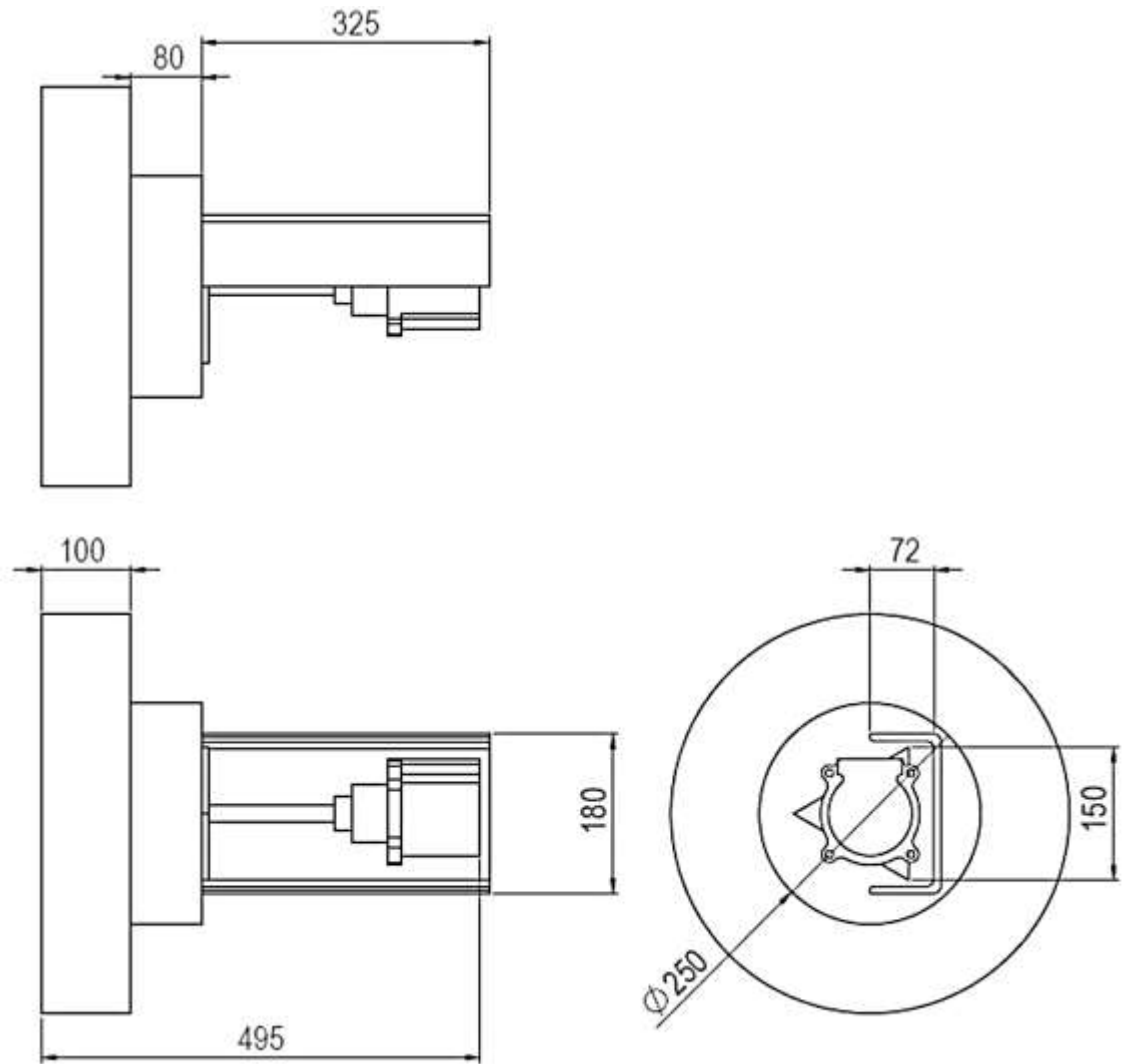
Engineering Drawings of the Final DFH₂ Speedometer System
